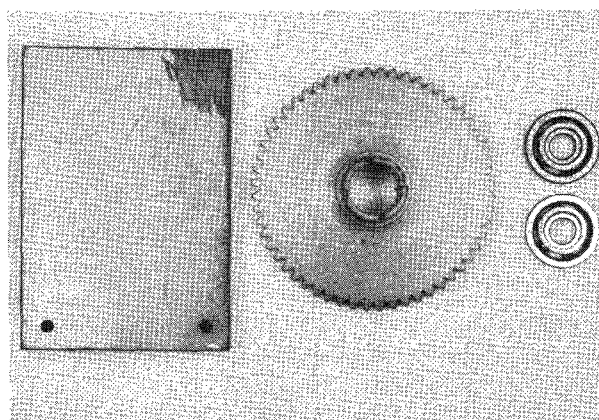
Typical specimens coated with the in situ film. Mag IX; reduced for printing.
